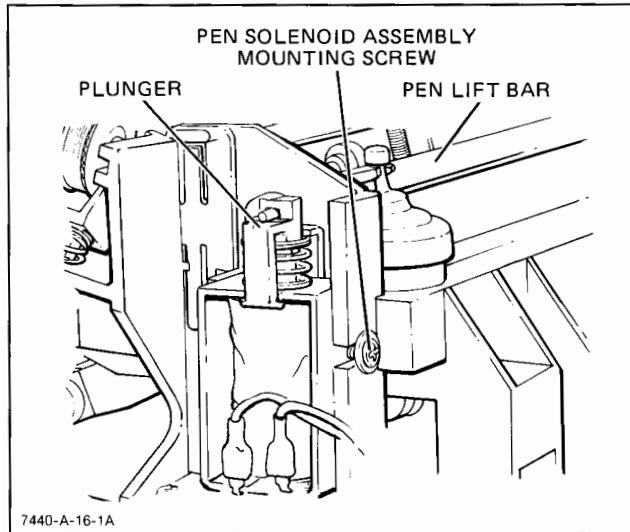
Pen Solenoid Assembly Removal, Detail B
